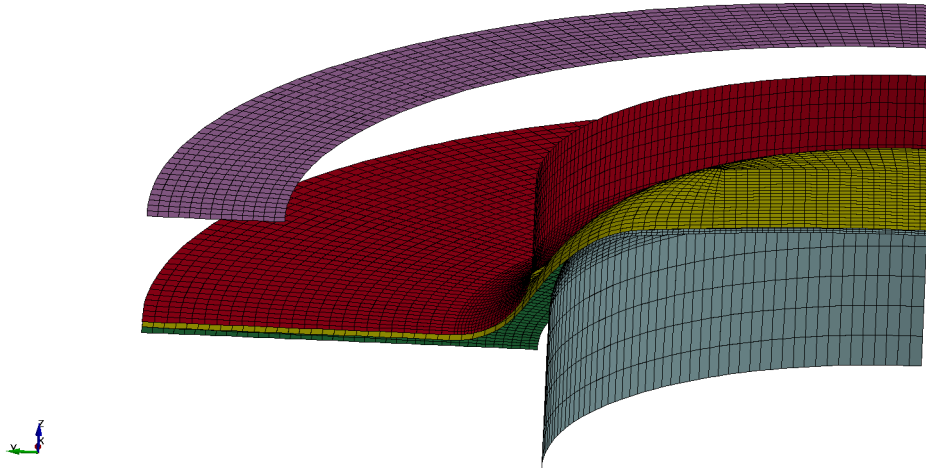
The fourth forming step, where the red part is the die 8, yellow: the blank, Green: Blank Holder, blue is Punch 7, and purple is the blank holder 2.
